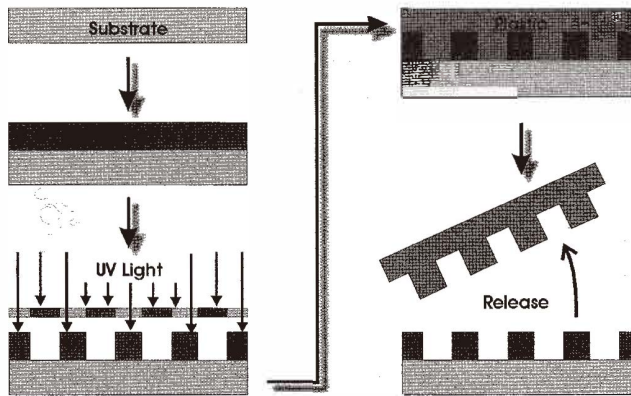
Fabrication of SU-8 master mold. The mold is placed in the injection molding system. The plastic is molded over the SU-8 and released.
